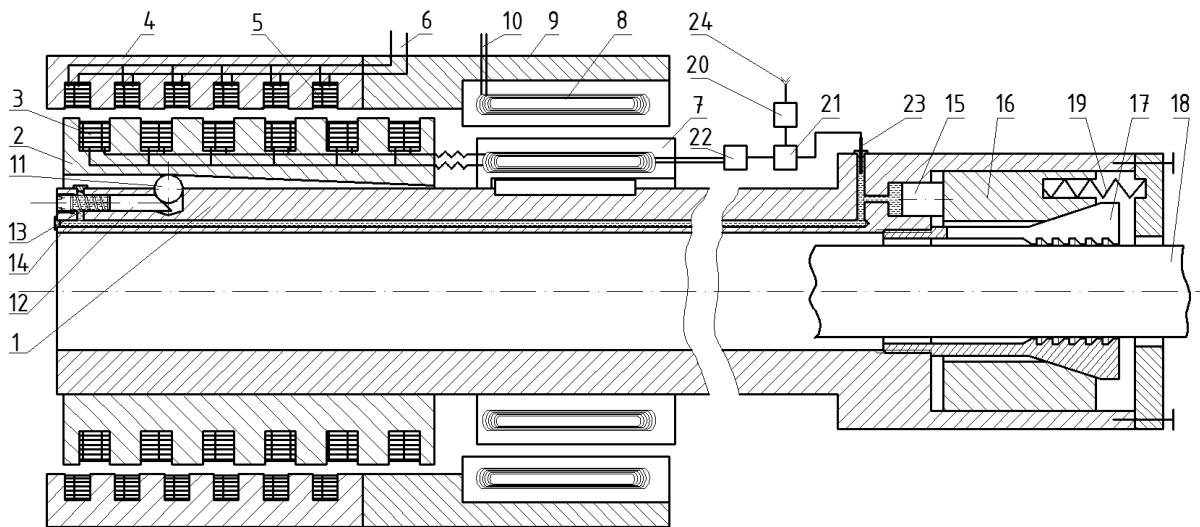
The mechatronic device with electro-hydraulic actuator for clamping objects in spindle units
